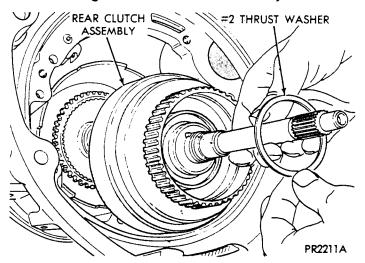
No. 2 Thrust Washer and Rear Clutch
